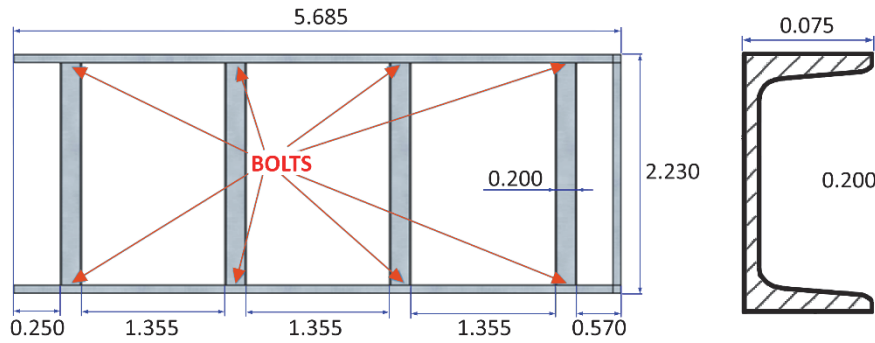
Dimensions of steel frame (left) and cross-section of U-beam (right).
